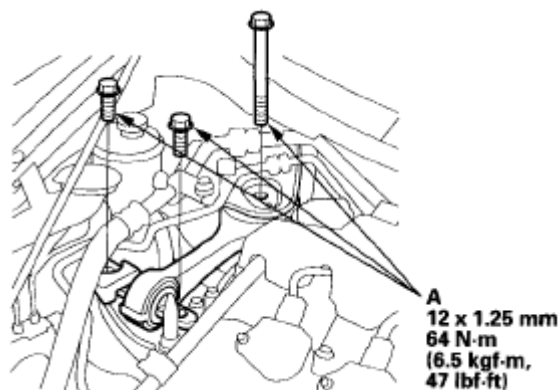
Identifying Upper Torque Rod Mounting Bolts (With Torque Specifications)
